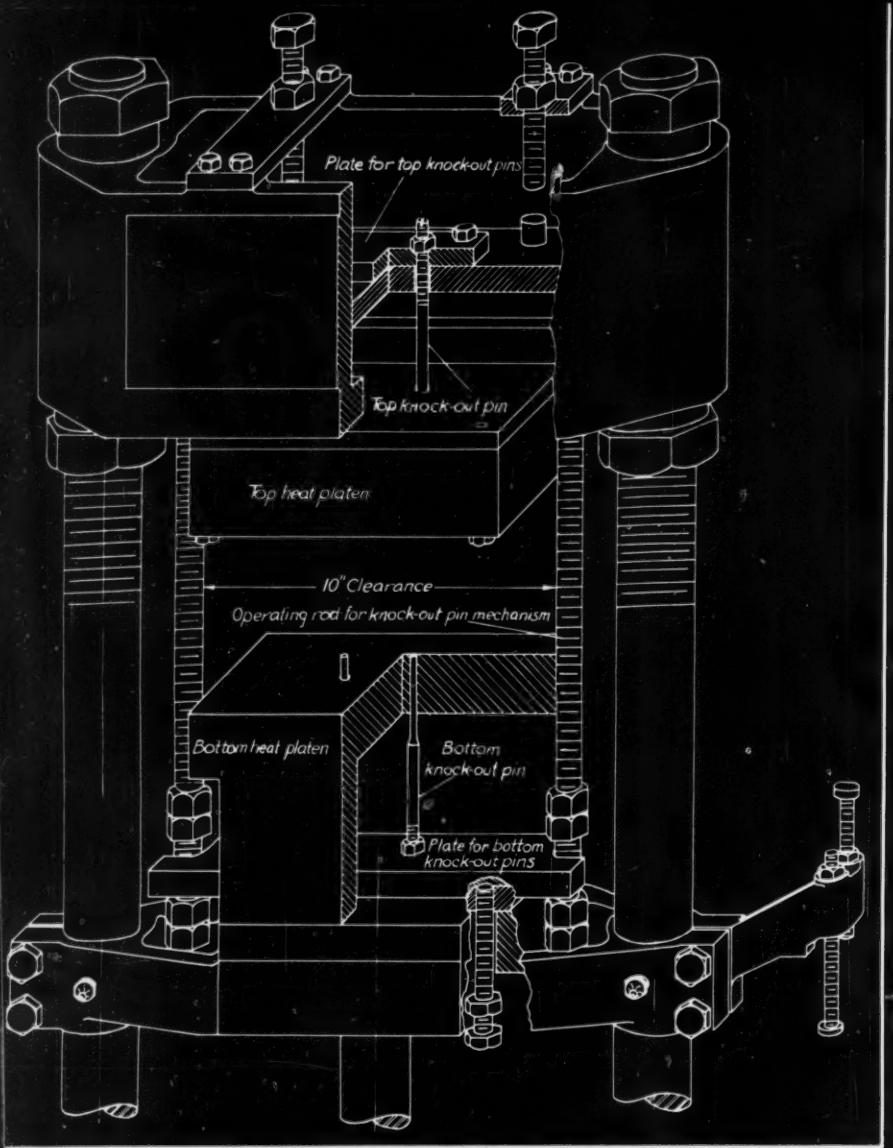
Location and mode of operation of knockout pins are shown in isometric of press platen assembly
